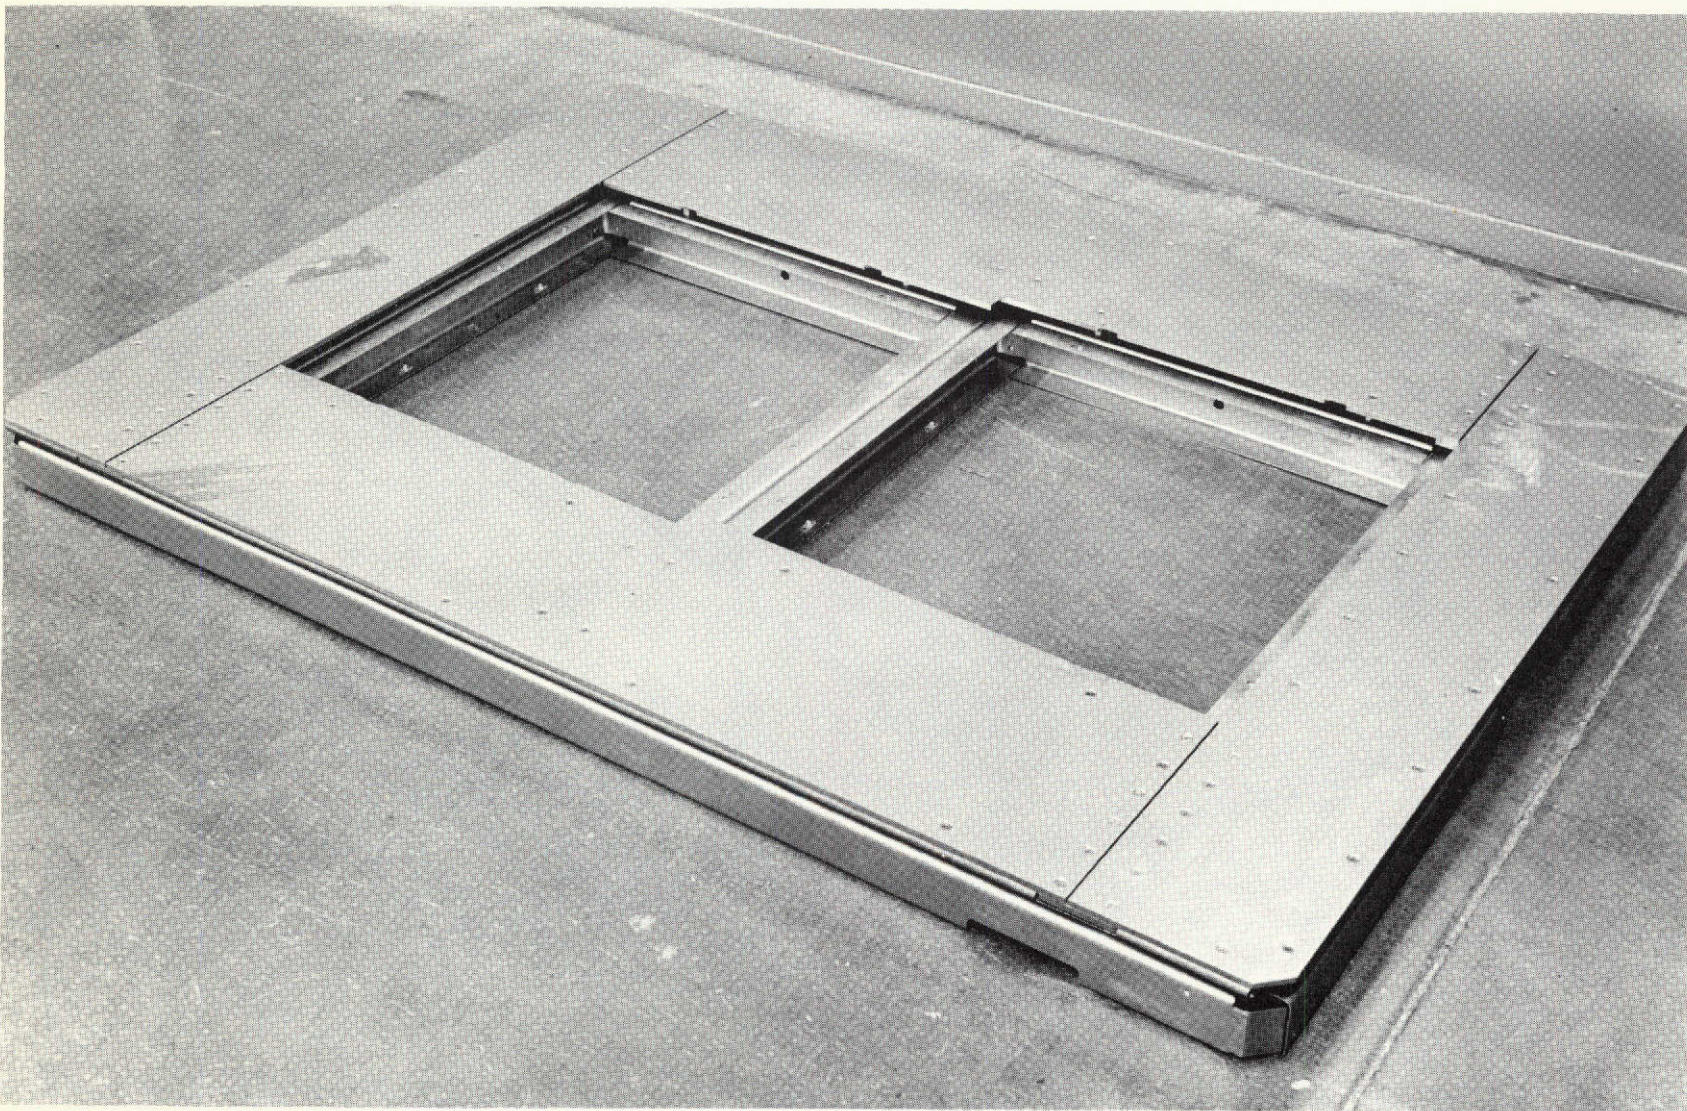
Top View of Titanium Substructure and Fairing for Wind Tunnel Test Assembly
